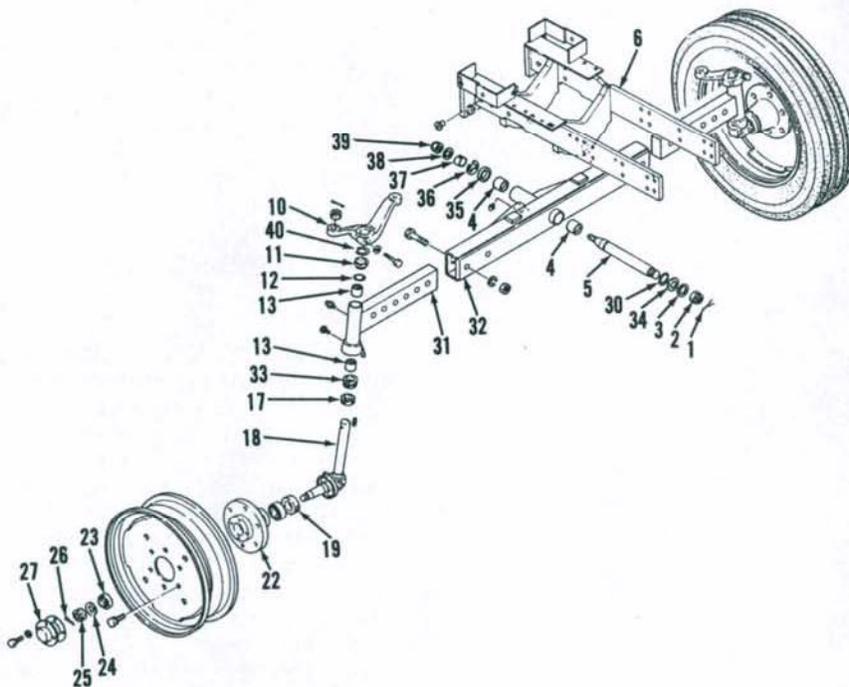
Exploded view of adjustable axle used on YM330 models.
